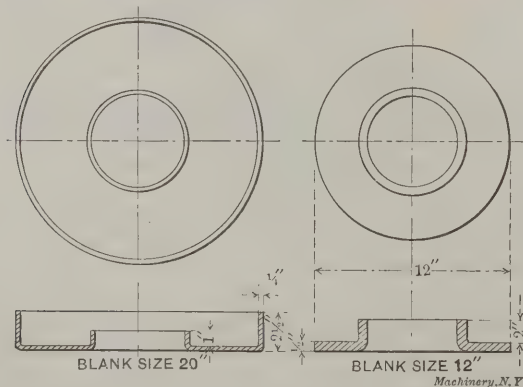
Samples of Work, Stamped Cold in the Machine shown above.
